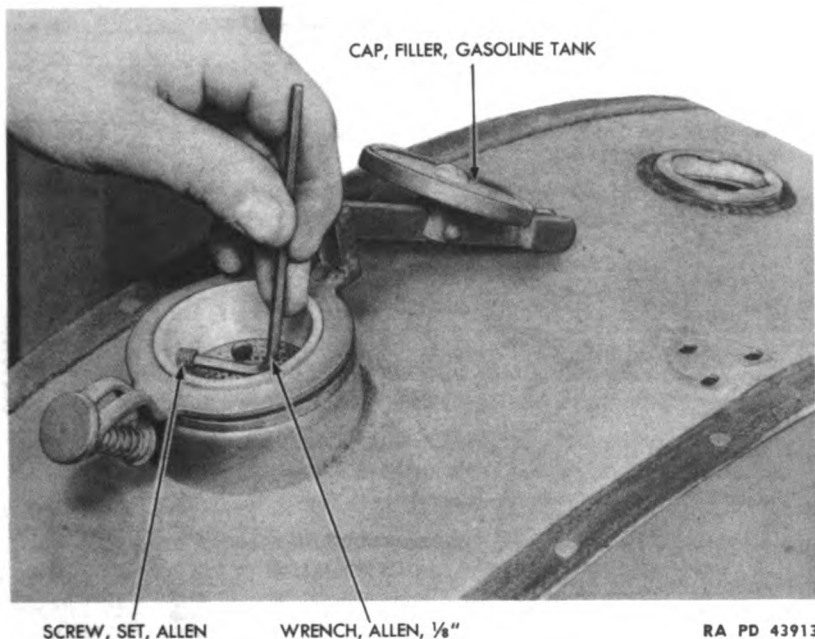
Removing Gasoline Tank Filler Cap Assembly
